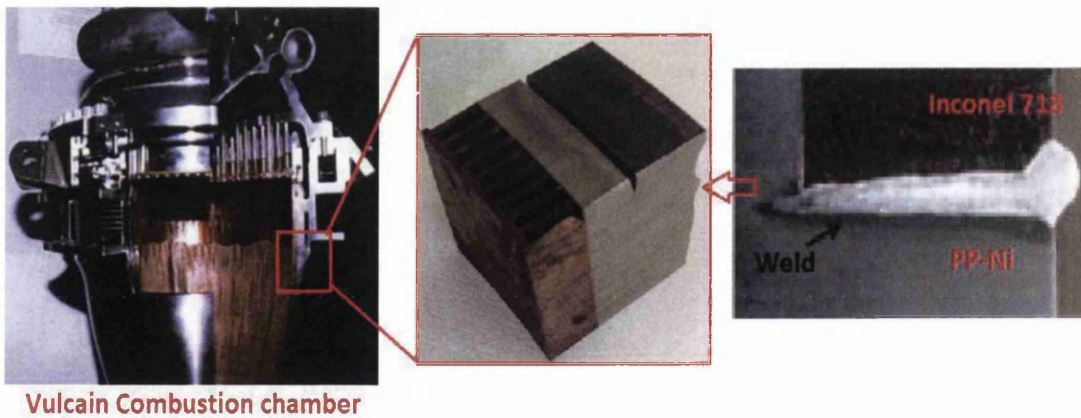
shows the Ariane5 Vulcain combustion chamber and a magnified view near the weldment. [260]
